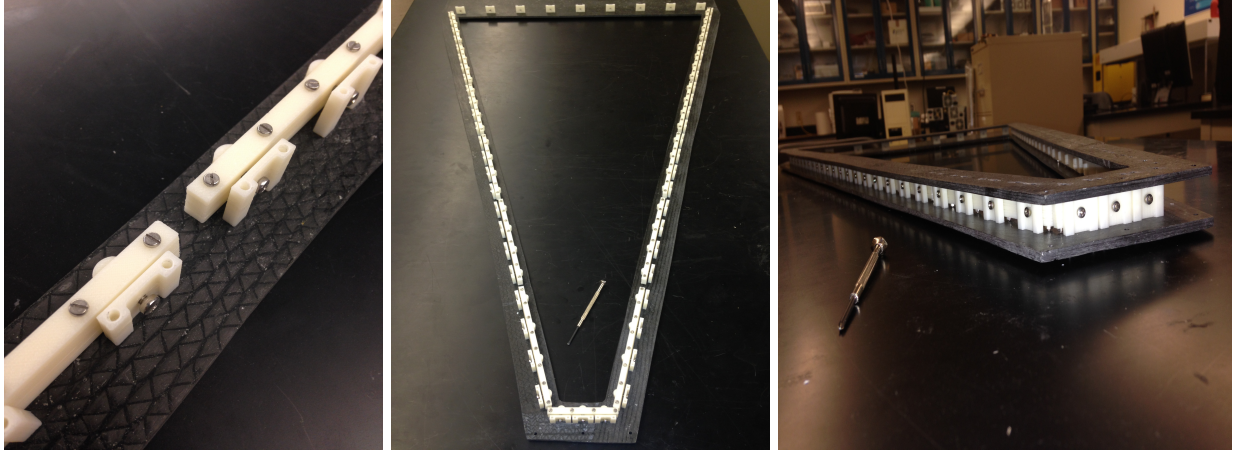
Test assembly of Florida Tech forward tracker prototype with 3D-printed pull-out posts and inner frame pieces mounted on one carbon fiber frame (left and center) and sandwiched between both carbon fiber frames (right).
